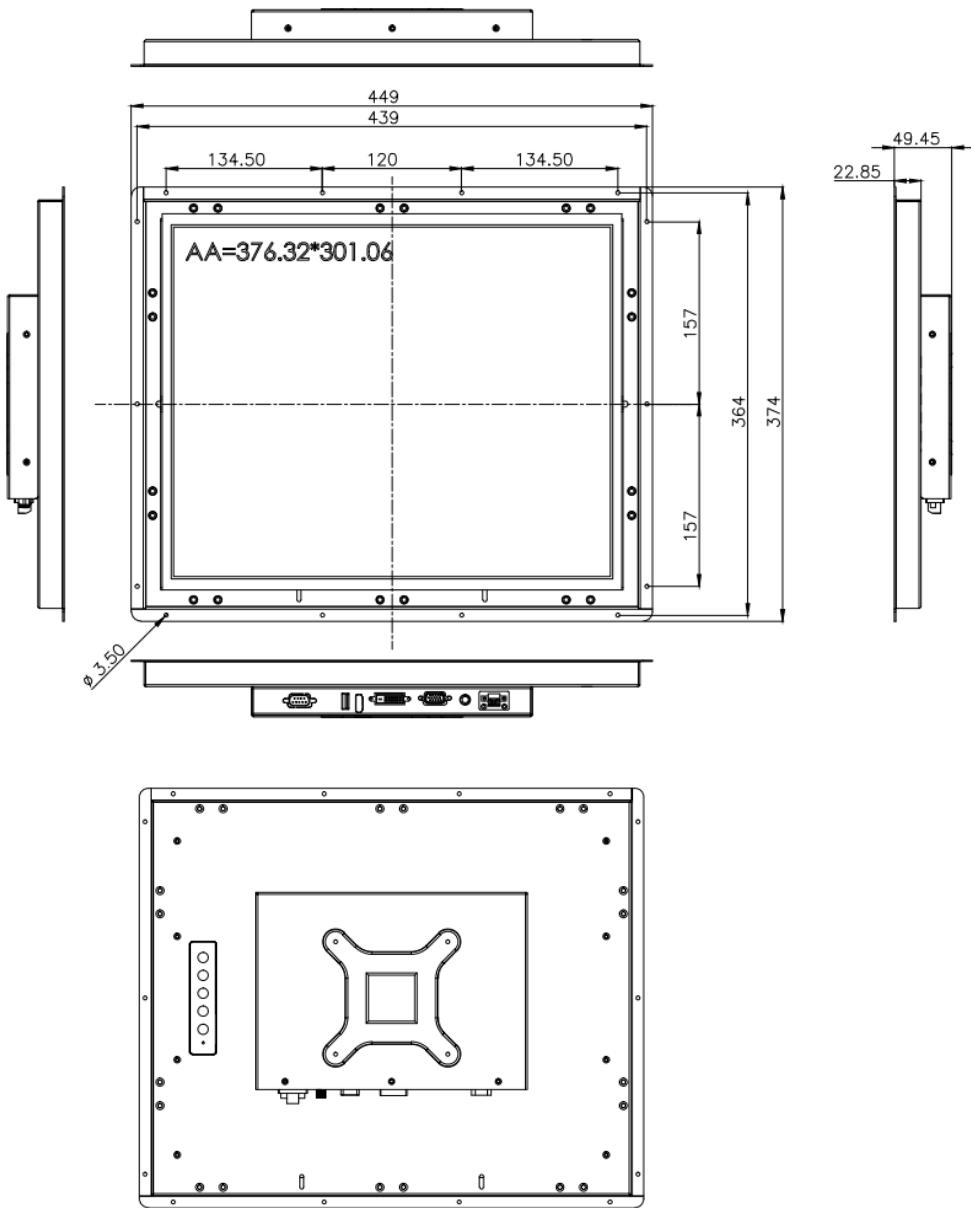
LCD-KIT-F-19A Physical Dimensions (millimeters)
